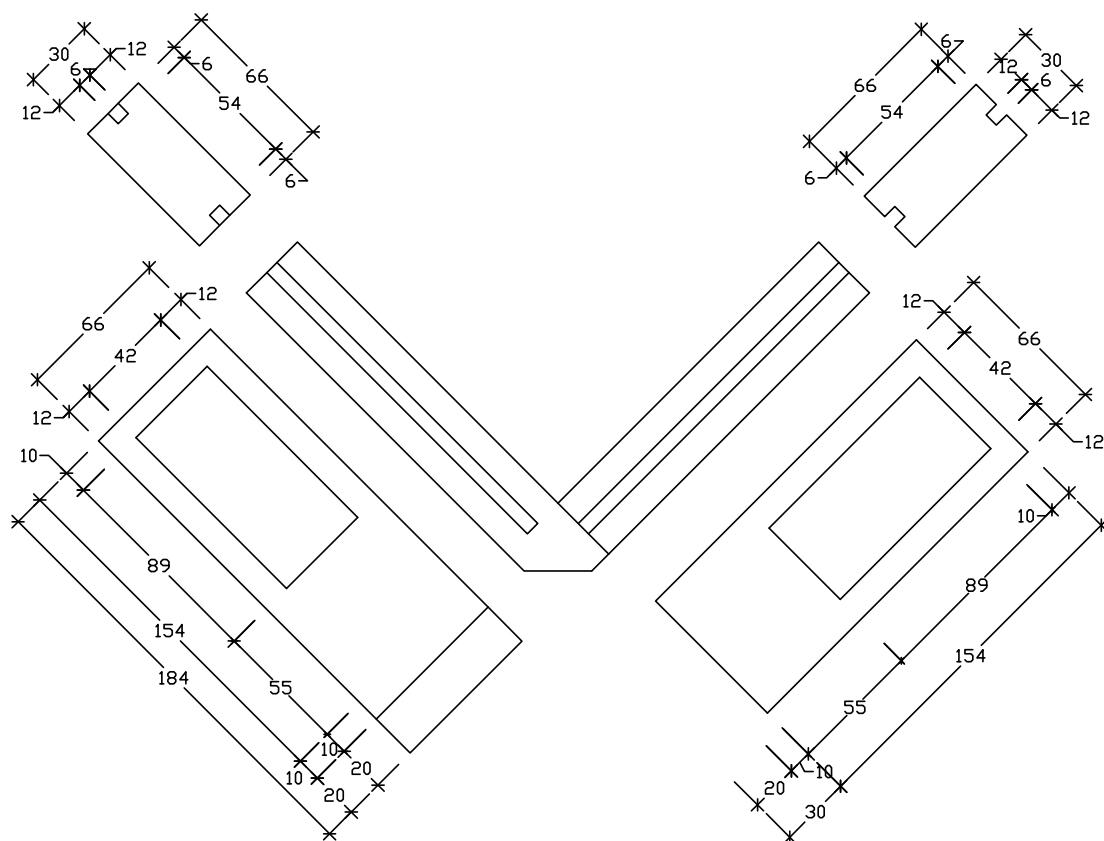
Technical drawing of the biaxial test rig. Top and bottom part of the test rig structure are made of Teflon.
